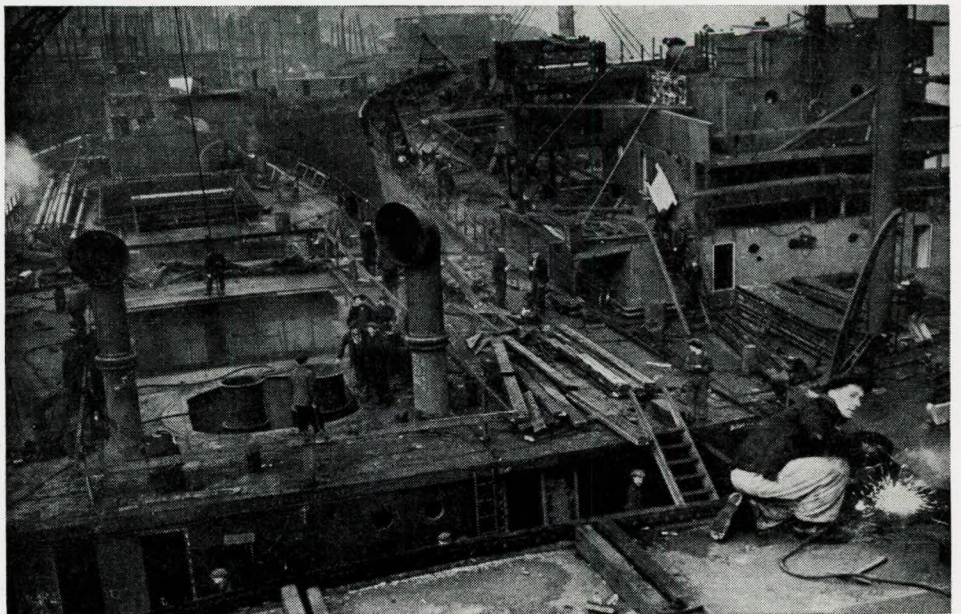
Pre-fabrication, combined with welding, has done much to speed up the ship-building programme. This photo shows a welder just about to complete a "run" on the deck of a cargo vessel under construction in a British shipyard.
